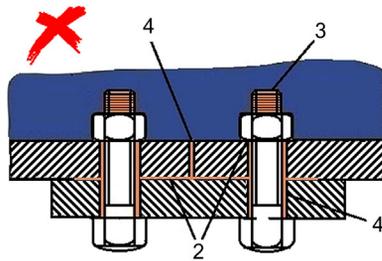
Exposed bolt ends and nuts in the product zone (1) are not allowed because they give rise to metal-to-metal contact corrosion (2), exposed threads (3) and crevices (4). Debris also tends to adhere to and around fixings and provides nutrients for microbial slime growth. Exposed threads should be cut to the correct length or preferably domed nuts should be used (Lelieveld et al., 2003; Hauser et al., 2004b).
